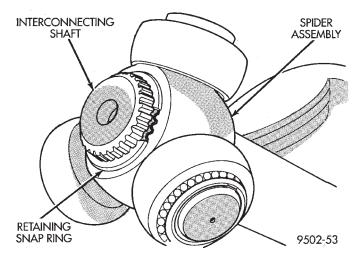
Spider Assembly Retaining Snap RingInstalled
